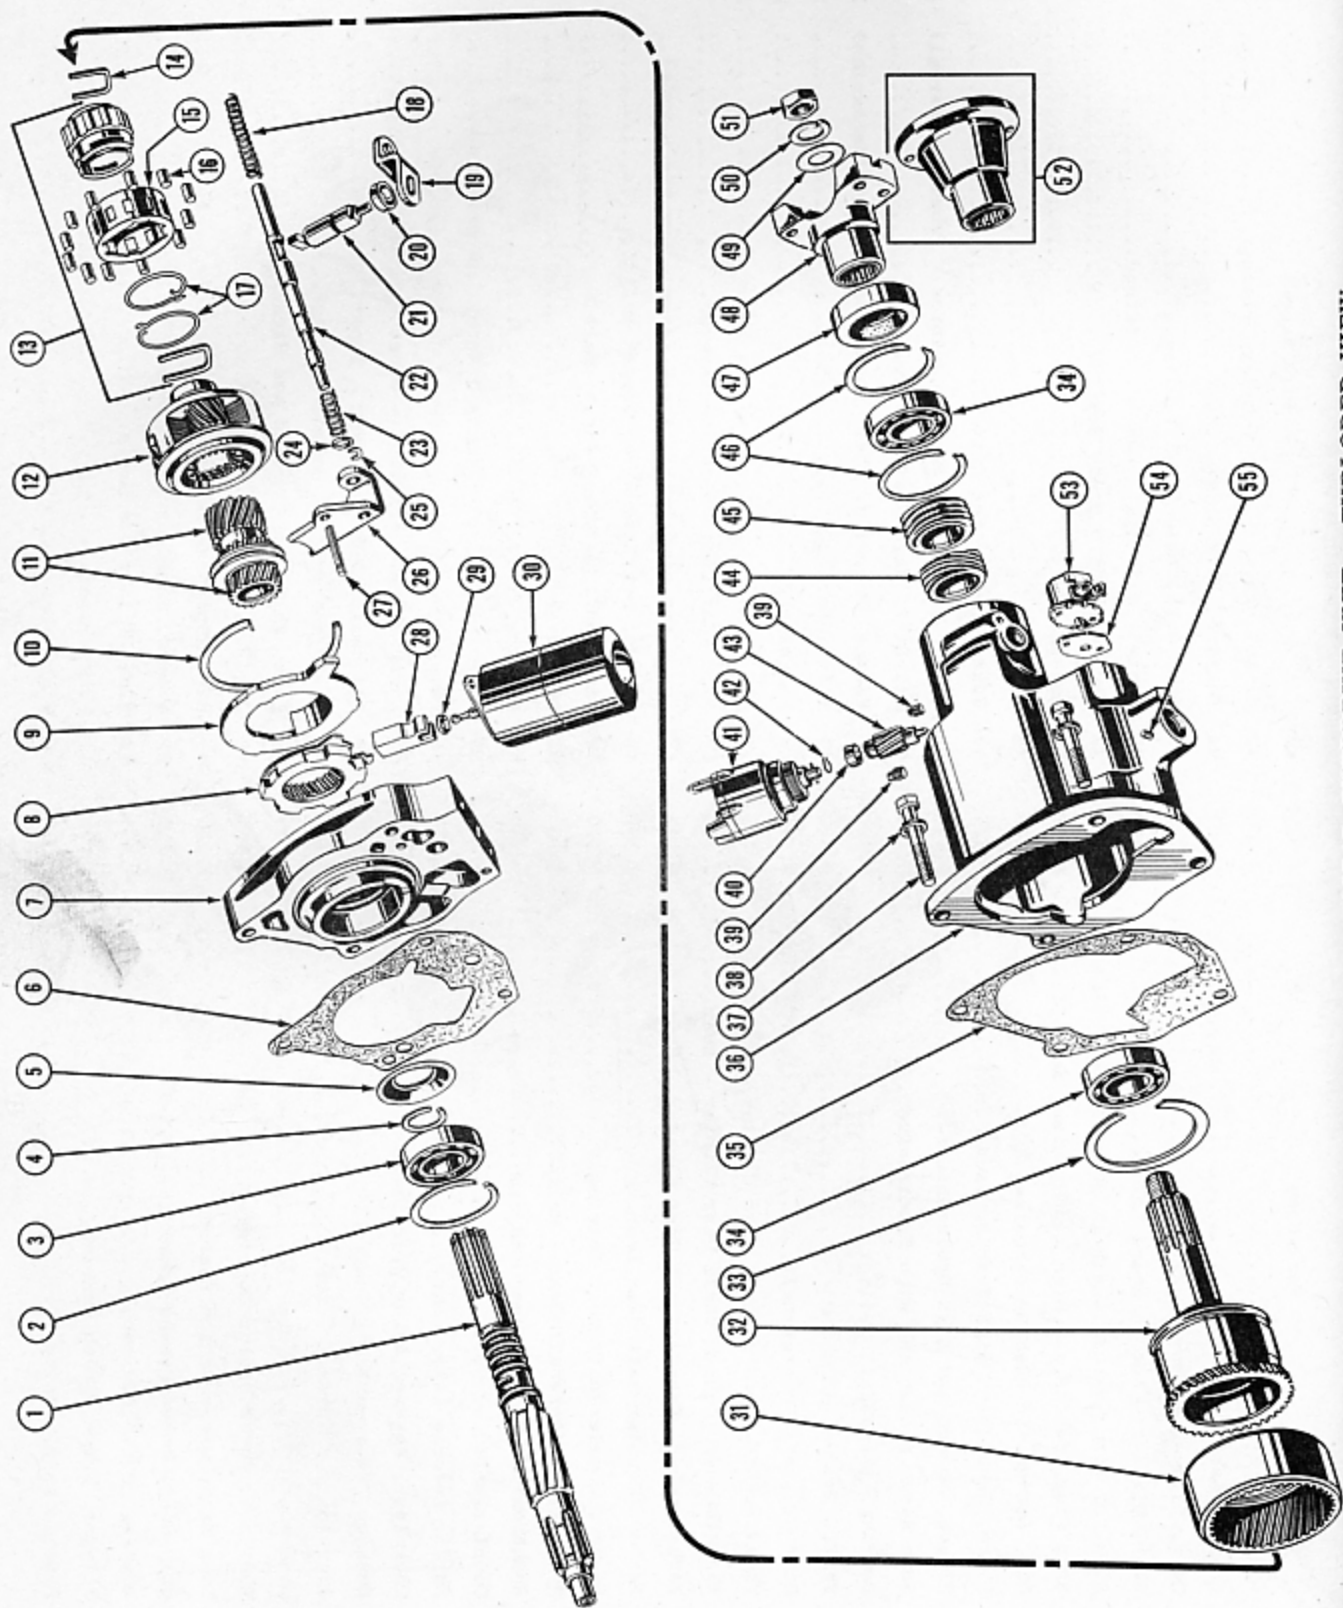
TYPICAL OVERDRIVE UNIT - EXPLODED VIEW
